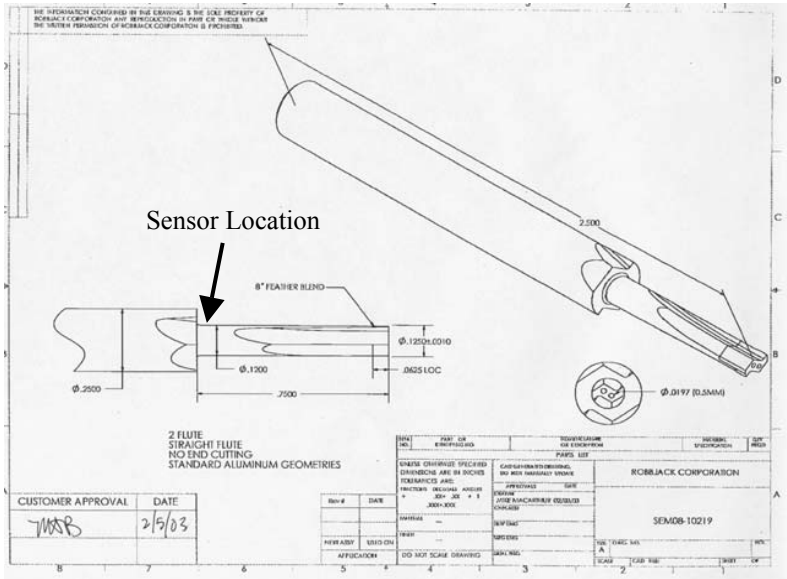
Tool dimensions, with approximate surface sensor location indicated.
